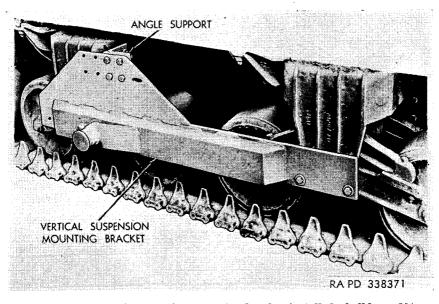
Vertical suspension mounting bracket installed—bulldozer M1.
